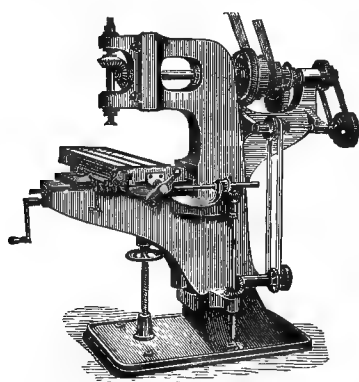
Upright milling machine, by Bariquand & Sons, France.
